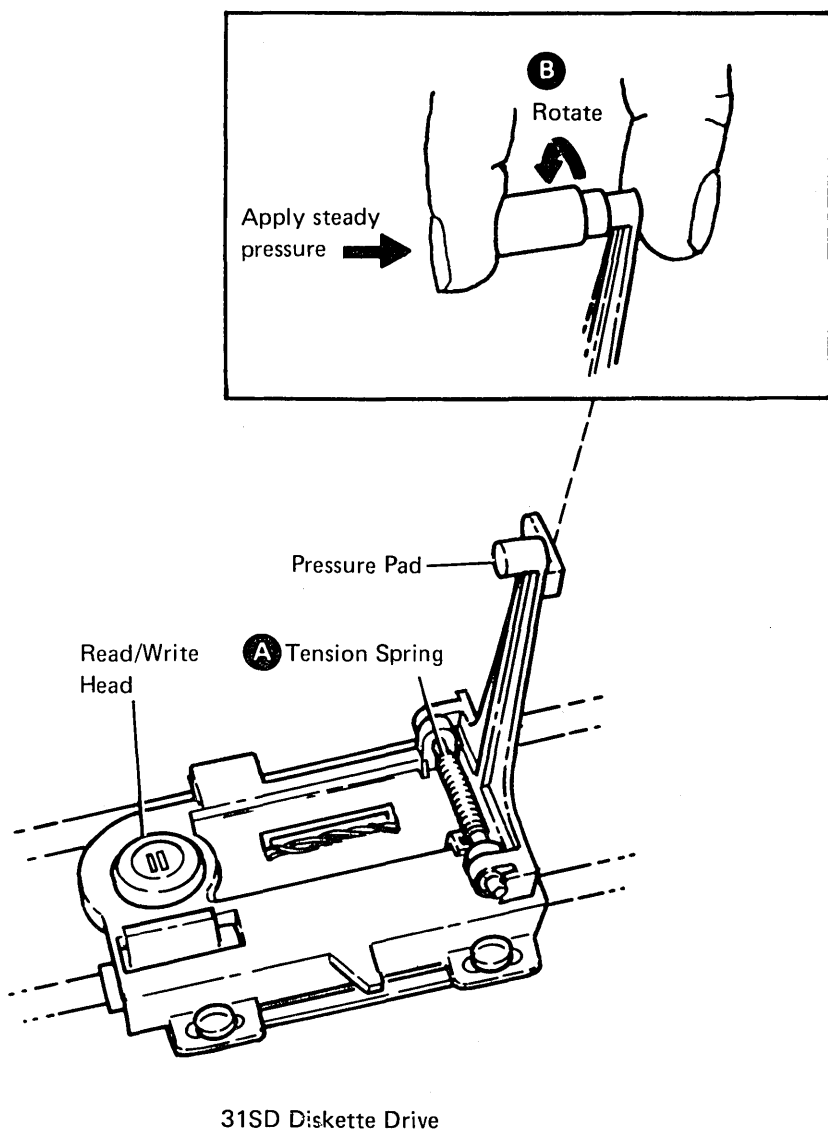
Head/Carriage Pressure Pad Removal and Replacement
